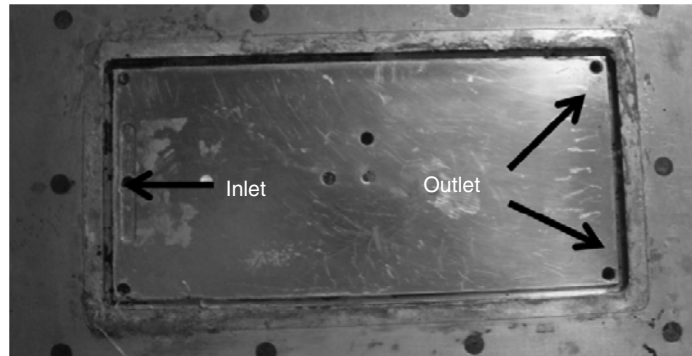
Stainless steel RTM mold without the preform and the top glass.
